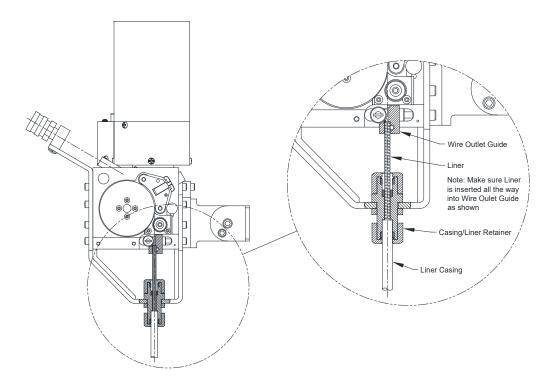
Liner and Casing Installation on WF-200 with Steel Alloy Kit
